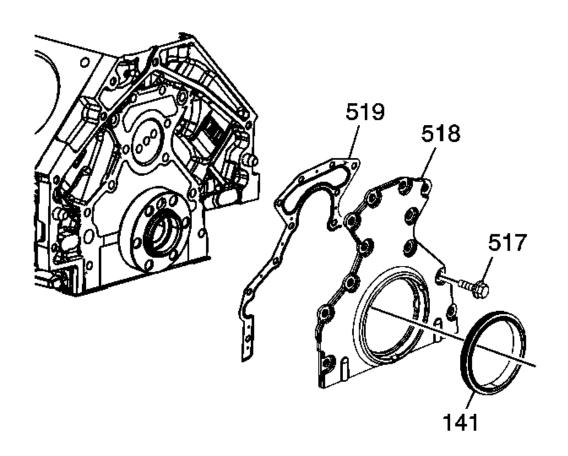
View of Rear Housing, Gasket and Seal Courtesy of GENERAL MOTORS CORP.
